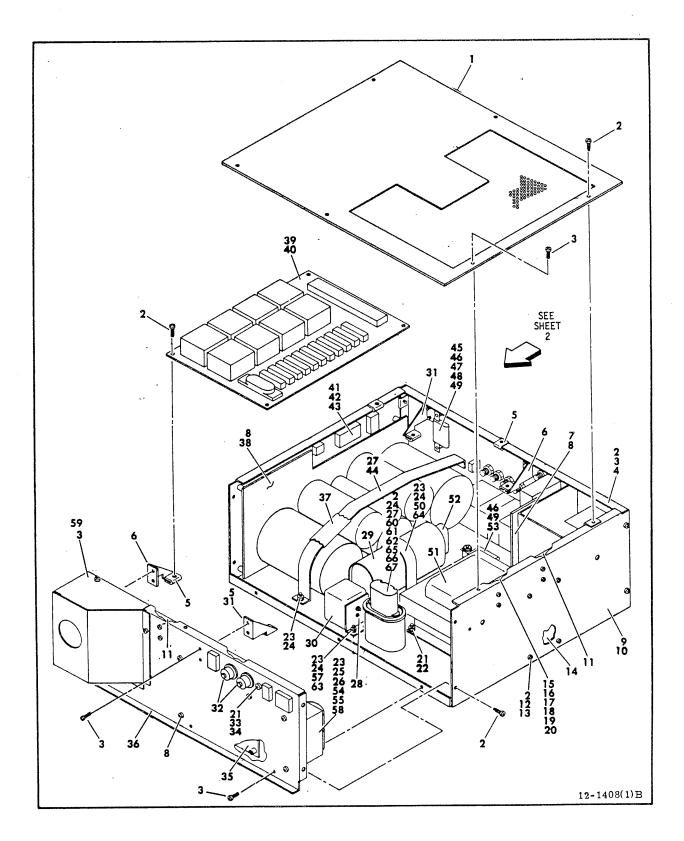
A-17. Power Supply Assembly Rear (VDE) (S/C 40 & Below)
